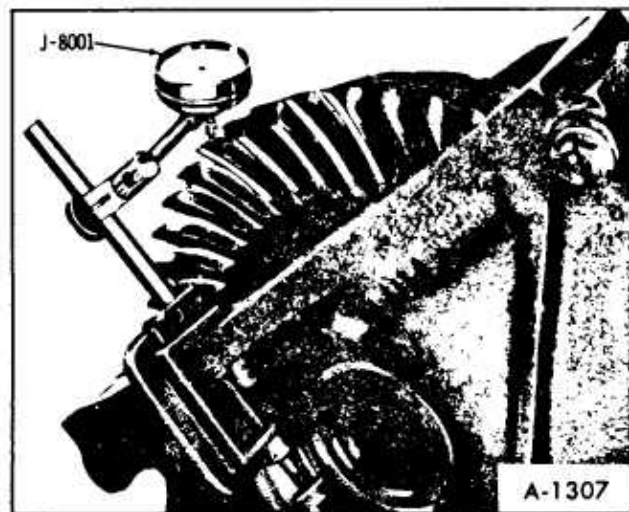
Checking Ring Gear To Pinion Gear Backlash
